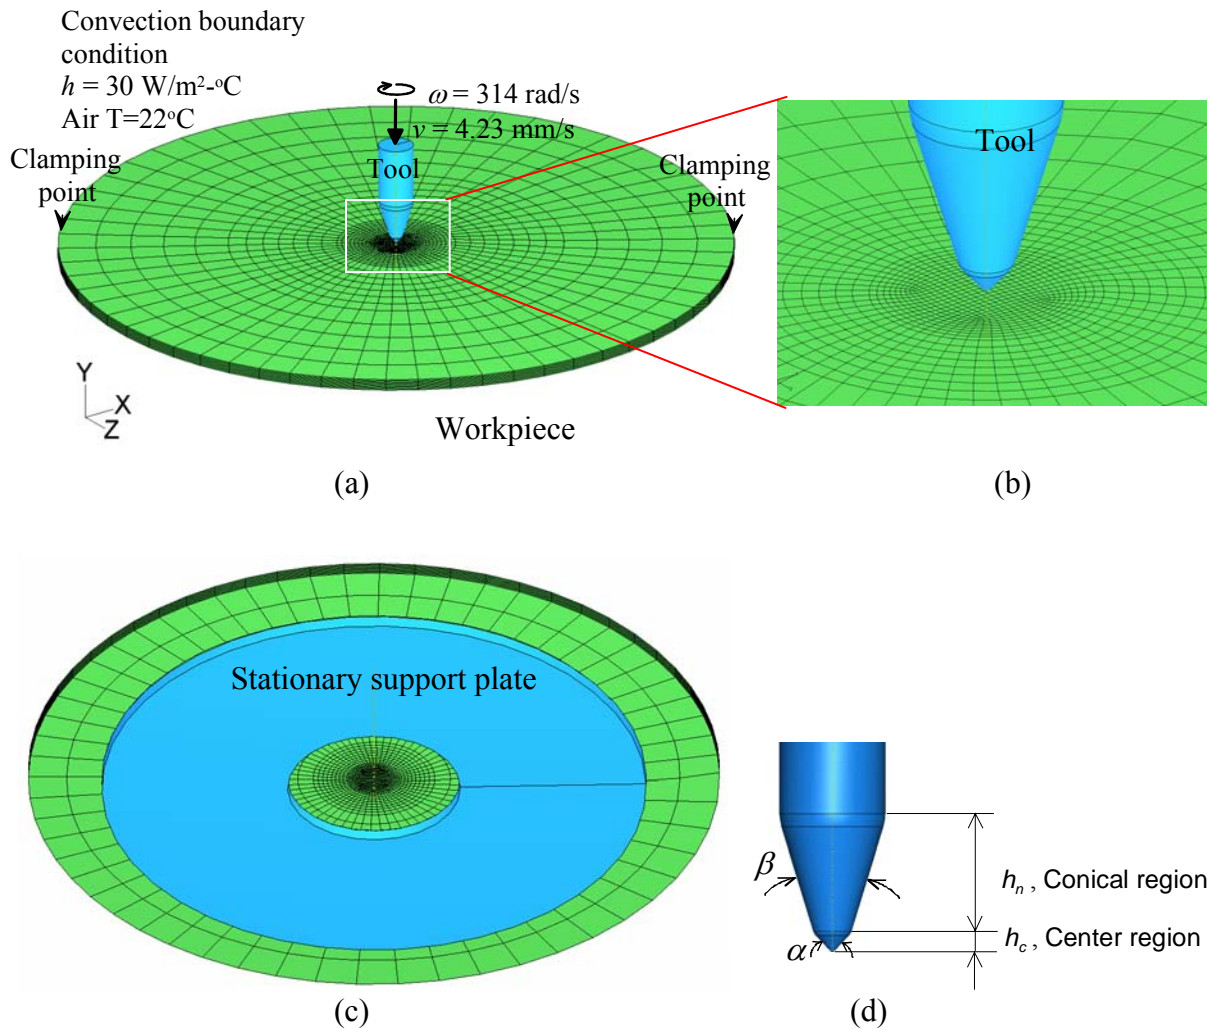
FEM modeling of friction drilling (a) initial positions of the tool and workpiece and mesh of the workpiece, (b) close-up view of the mesh near the tool tip, (c) bottom view showing the stationary support plate, and (d) tool geometry parameters.
